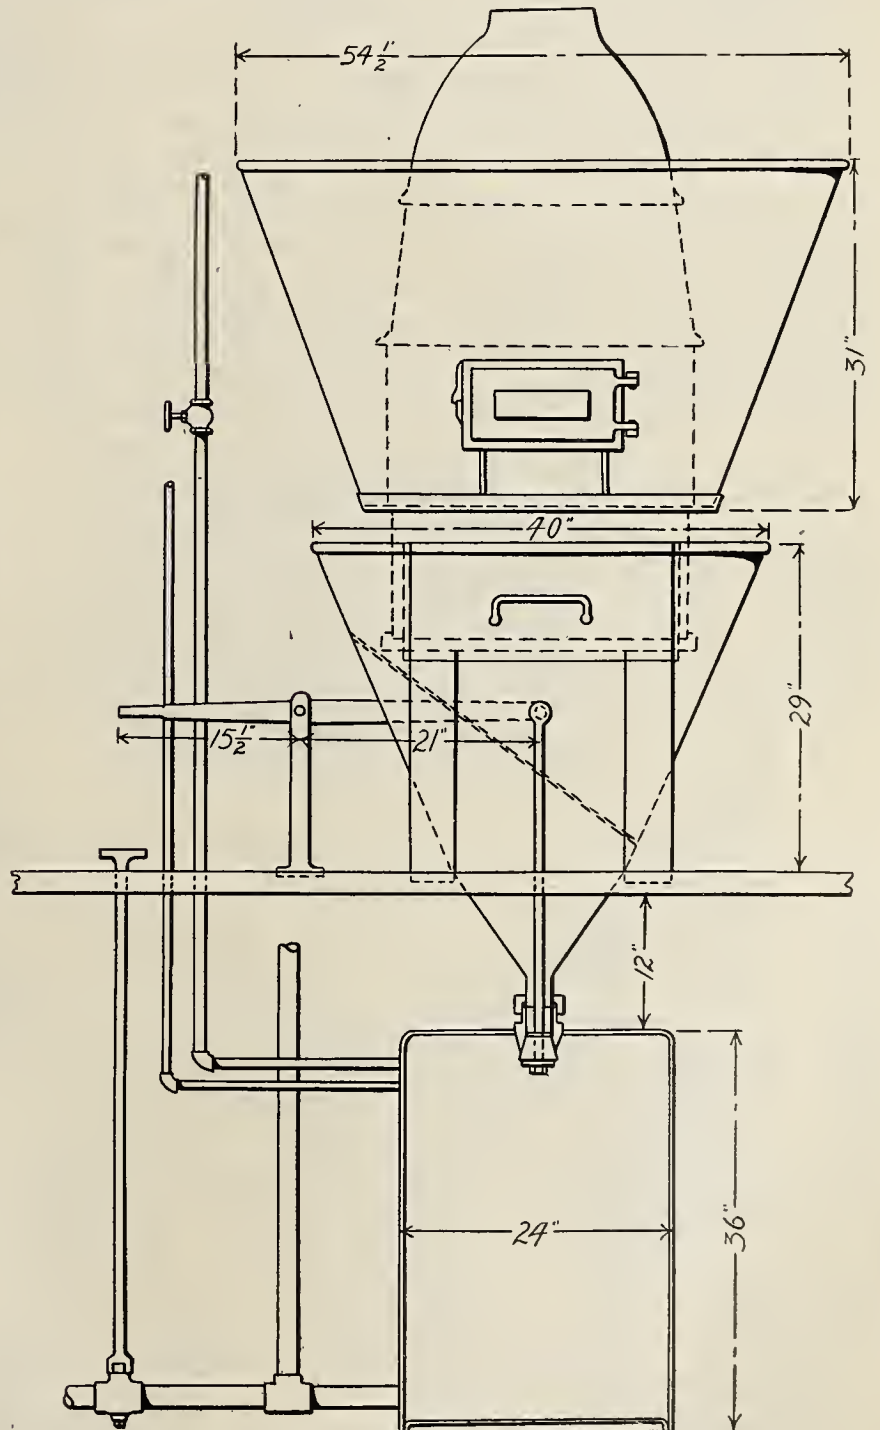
ERIE RAILROAD SAND STOVE AND ELEVATING DRUM.
